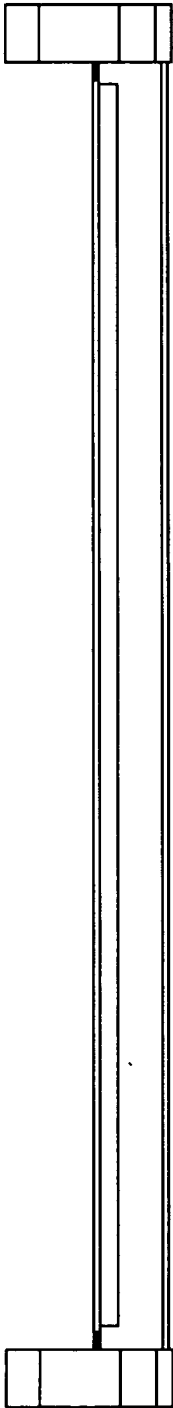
C: Right view of a floor frame (20 foot collapsible cargo container)
